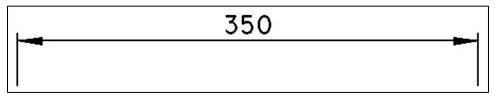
Dimension in millimeters. Always shown as a whole number
